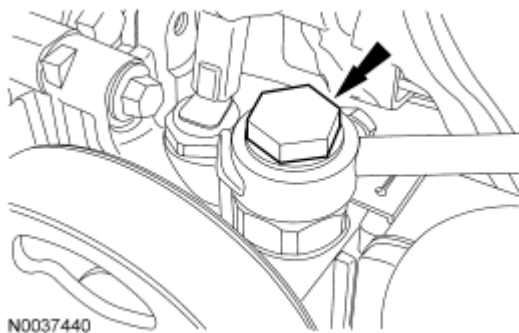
Locating Power Steering Pressure (PSP) Tube Bolt
